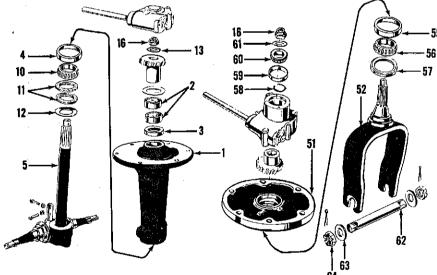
Exploded view of series 333 and 444 manual steering single wheel and dual wheel tricycle spindles and associated parts.
